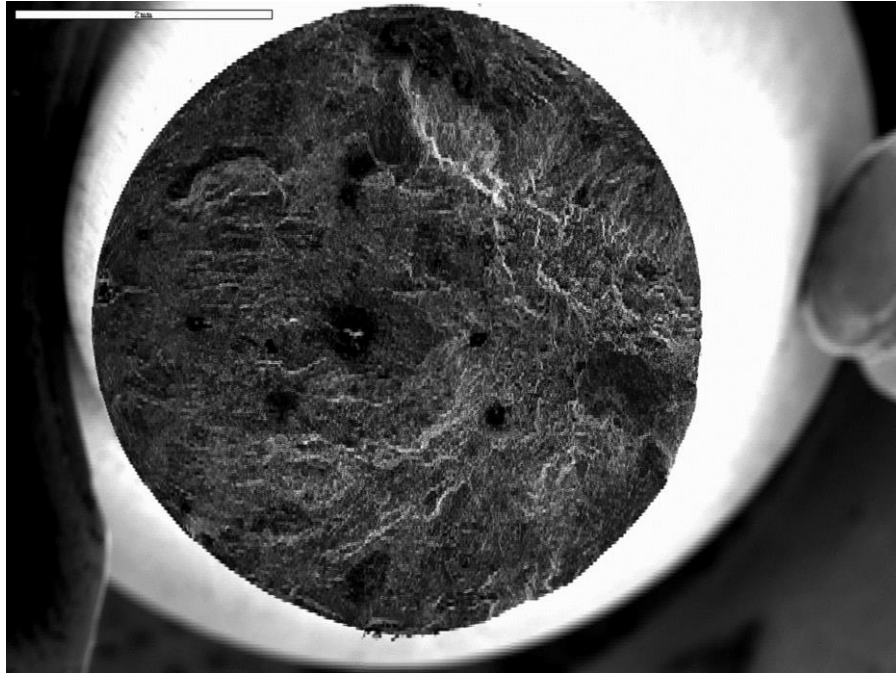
Overall view of the fracture surface of A356 rotating bending alloy specimen.
